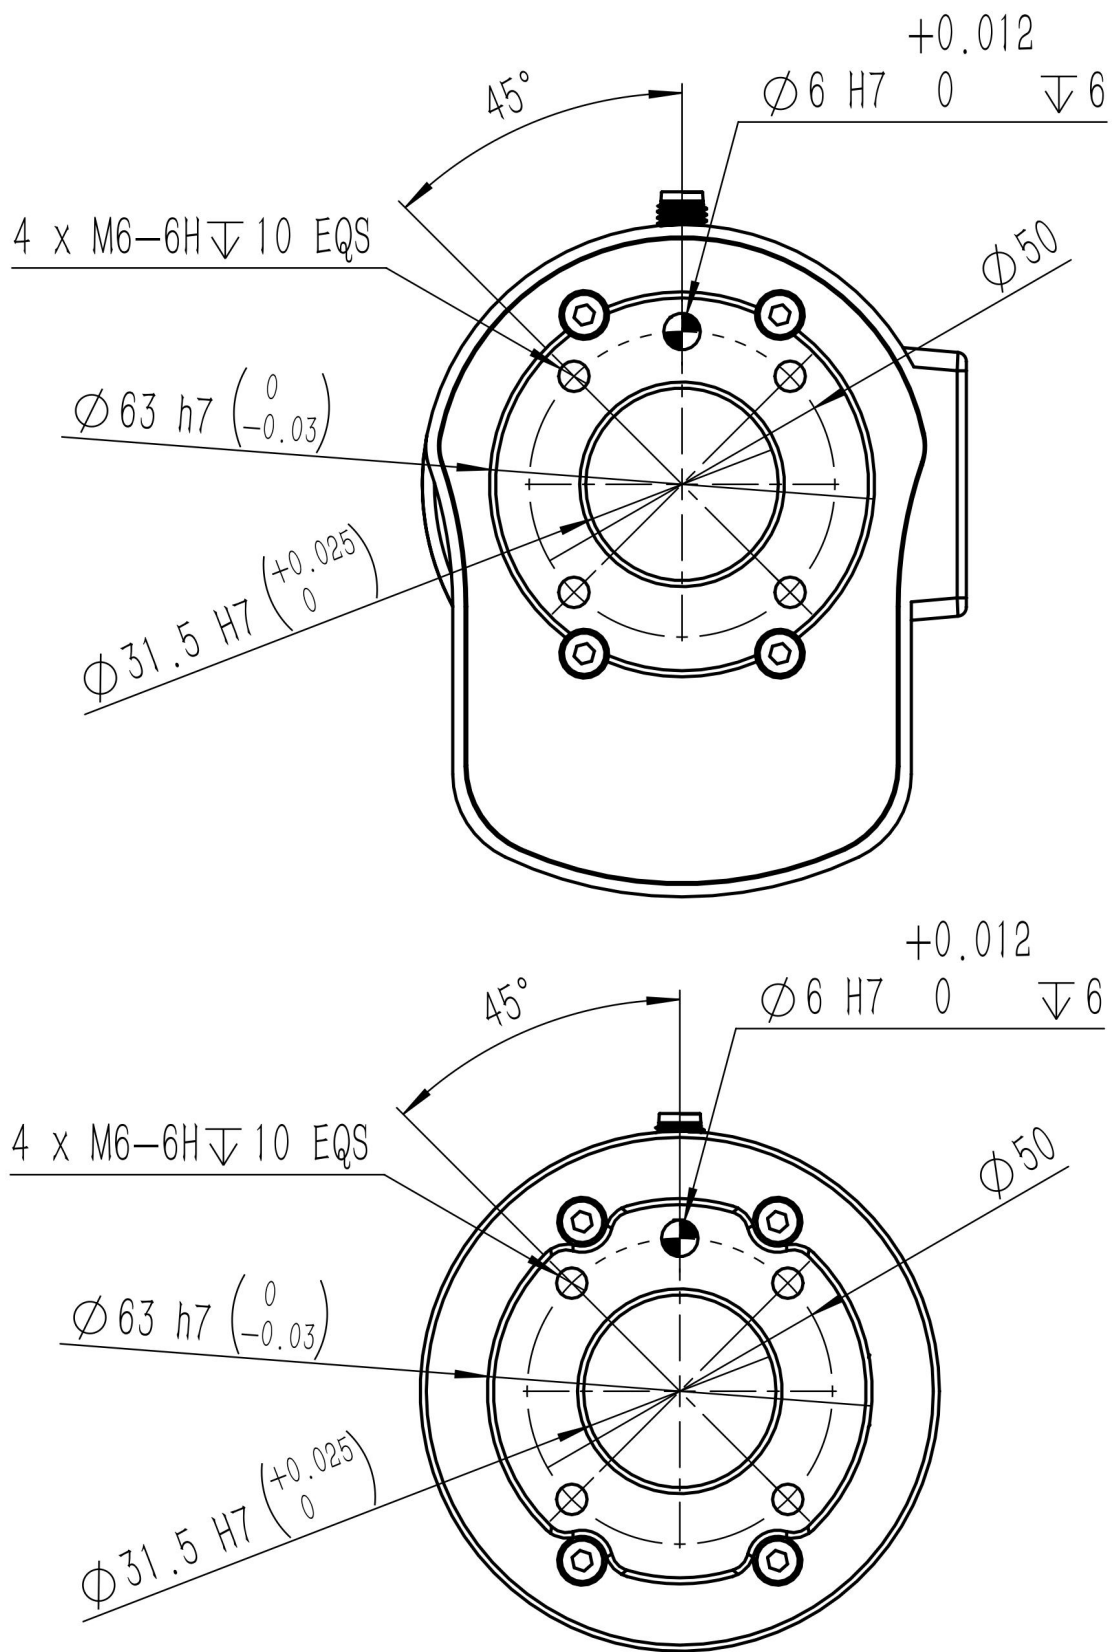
Mechanical Installation Interface of S5-90 Pro and Eco Flange
